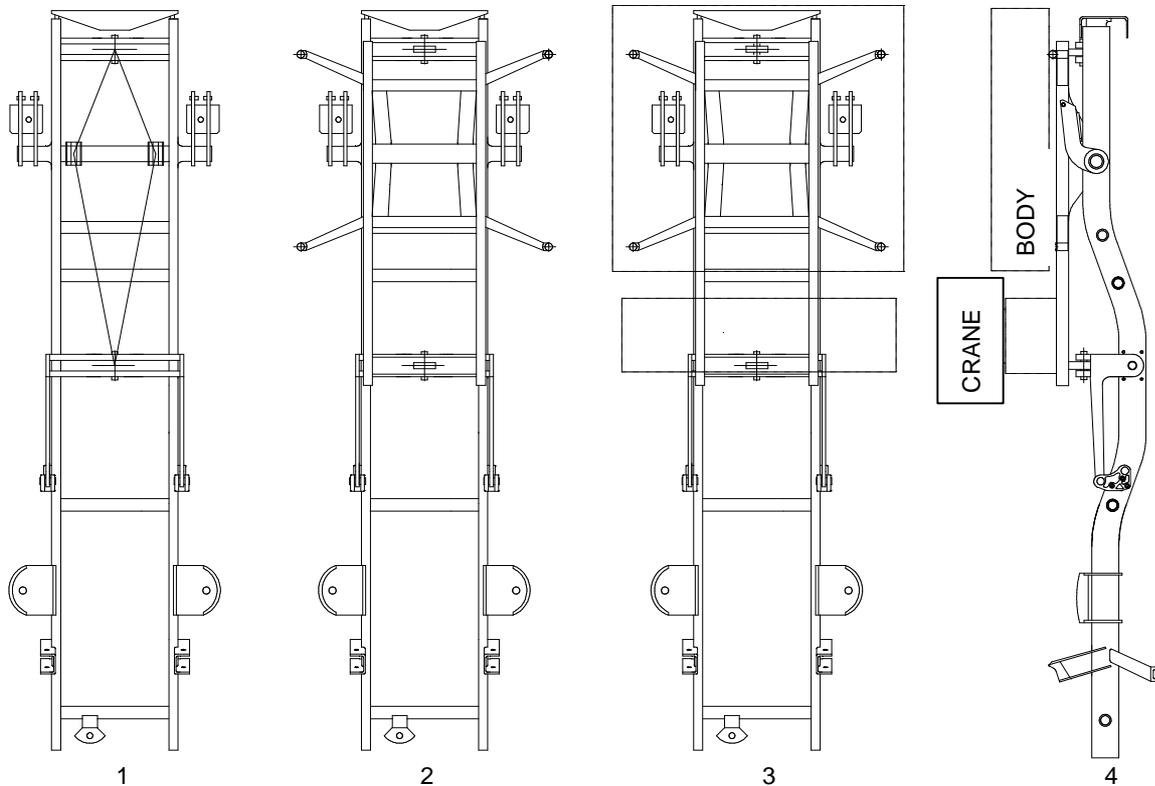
Schematic layout of a center implement (parts layout in stages)
